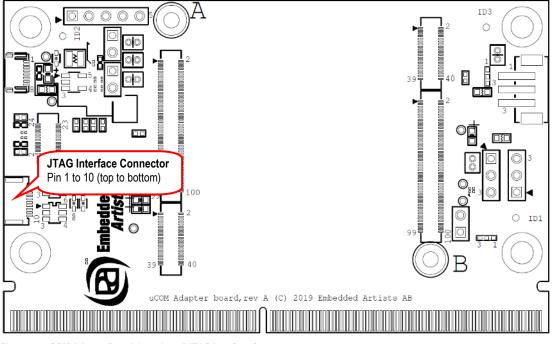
uCOM Adapter Board, Location of JTAG Interface Connector
